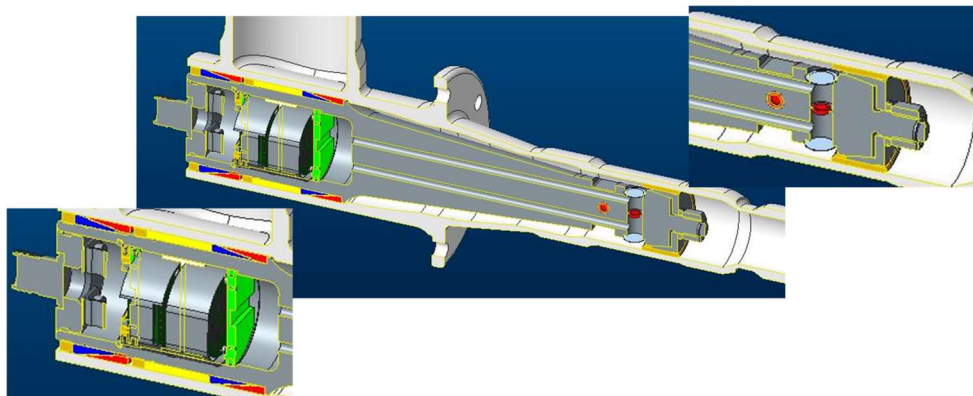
CAD picture of the cross-section of the load sensor. Right side: position of thin-film elements (red spots). Left side: electronic units within the dedicated chamber.
